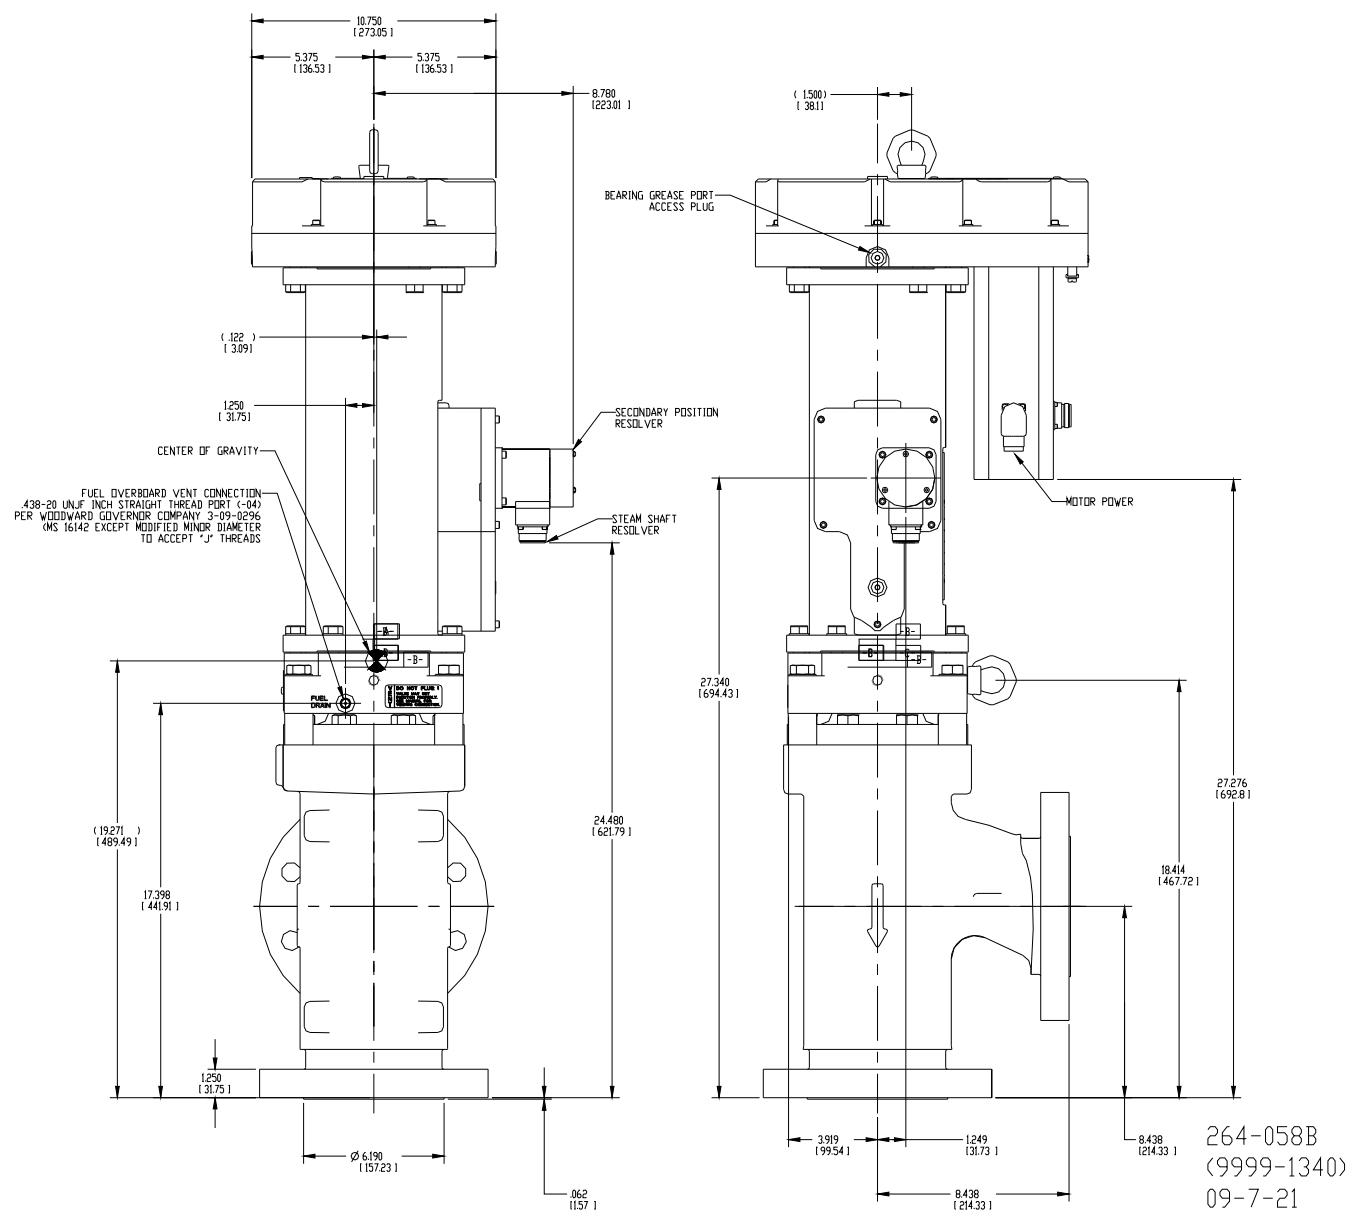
Outline Drawing 4" LESV (Right View)
